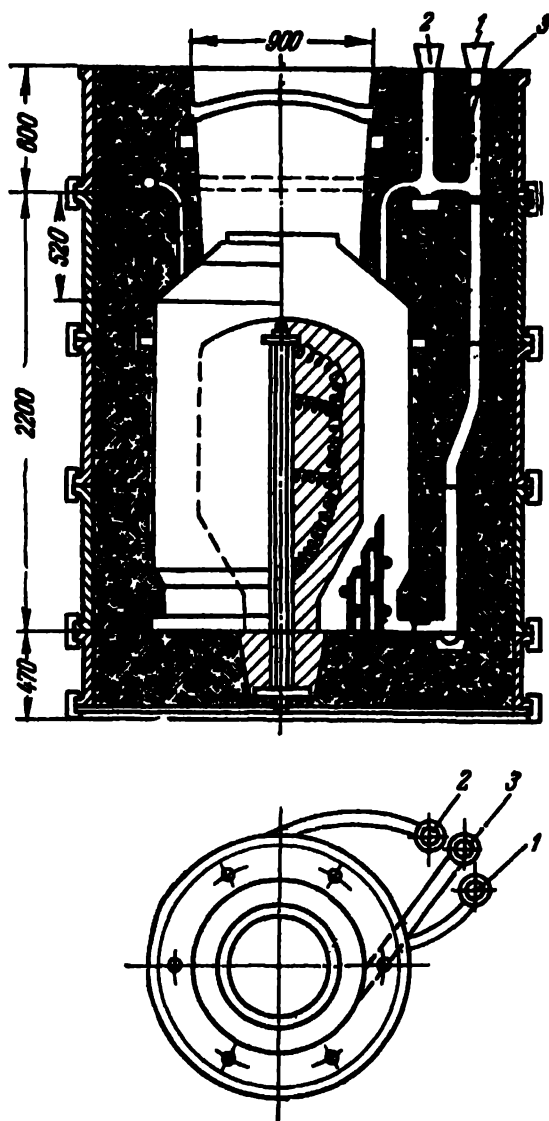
Mould for casting a ram (Vasilyev, Chepel):
